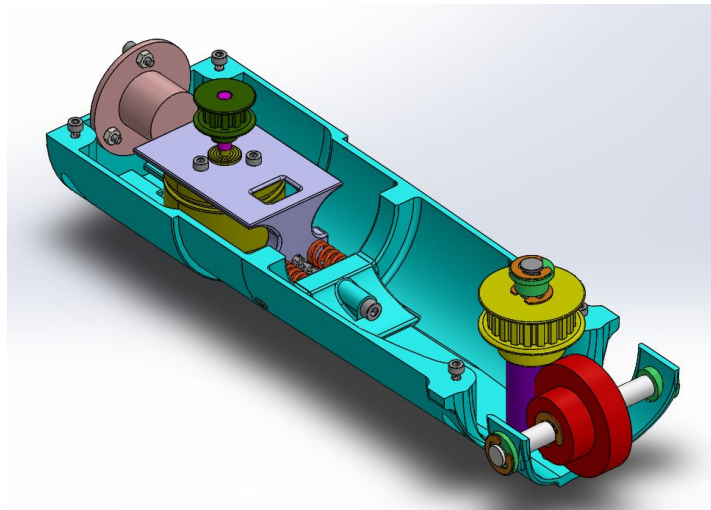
Isometric view of the CAD model without the Ada Hand with the top inner sleeve mechanisms casing hidden. The belt for the transmission system is also not shown. However, it would connect the small pulley on the motor shaft (dark green) with the large pulley on the worm shaft (bright yellow).
